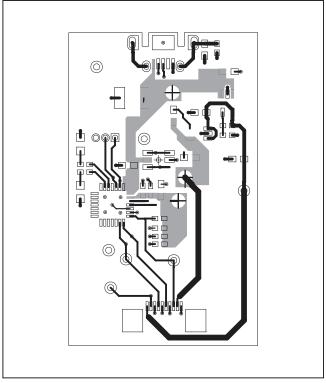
USBOSMB Mother Board PCB Layout—Component Side
